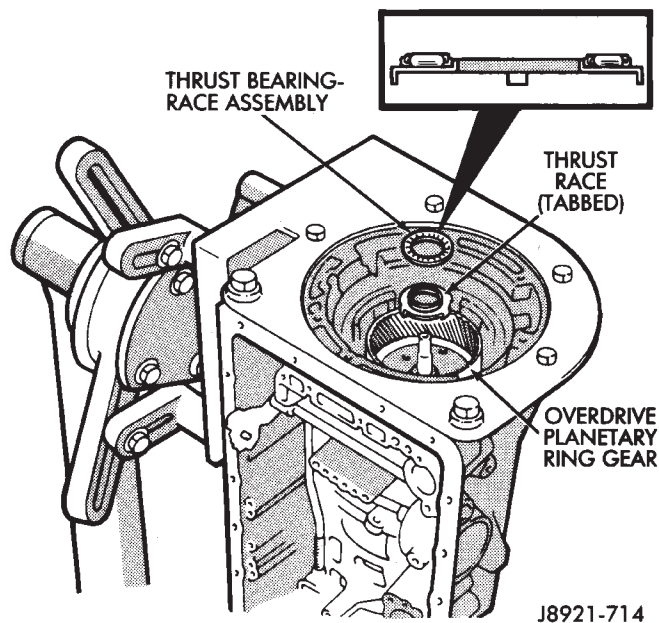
Installing Ring Gear Thrust Bearing And Race
